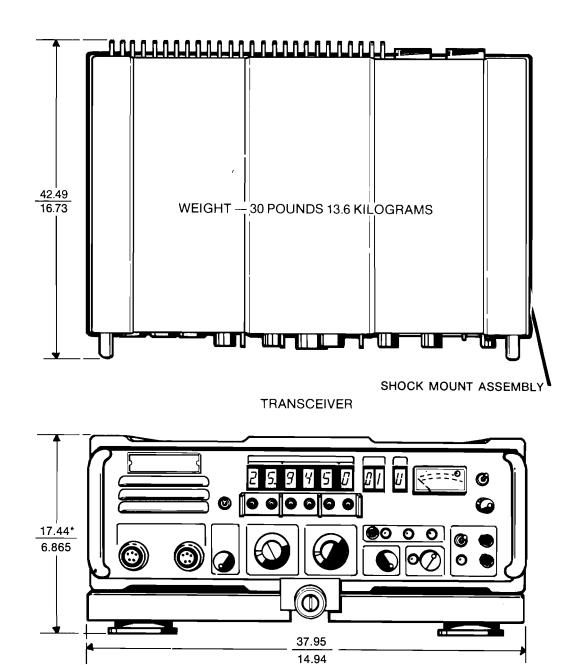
Transceiver/Shock Mount Outline Dimensions
